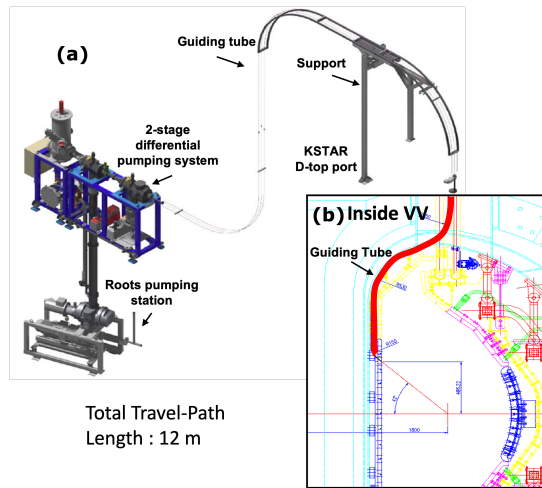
(a) PIS system CAD drawing including the guiding tubes for the pellets to be injected from (b) the inboard side of the KSTAR tokamak.
